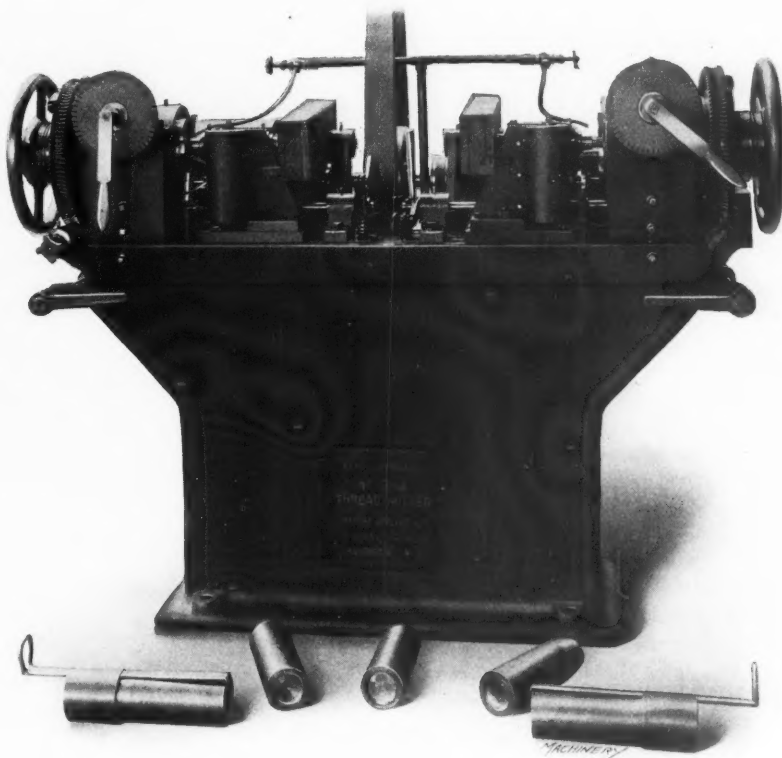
Thomson Semi-automatic Thread Milling Machine for threading Shells
